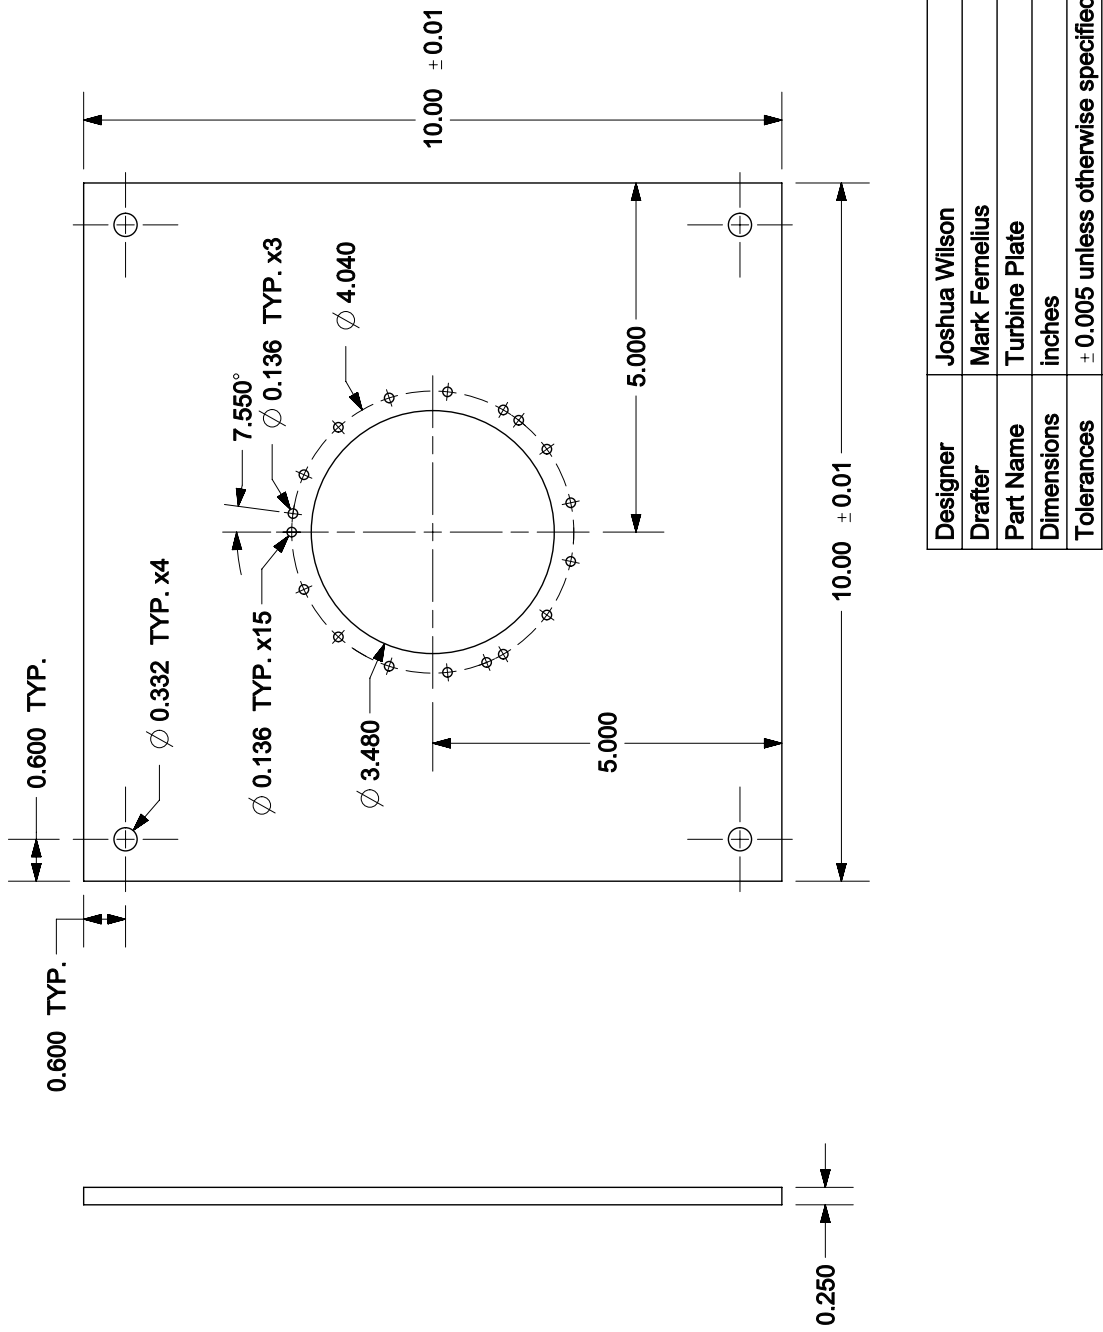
Plate to attach the turbine housing to the test rig frame.
